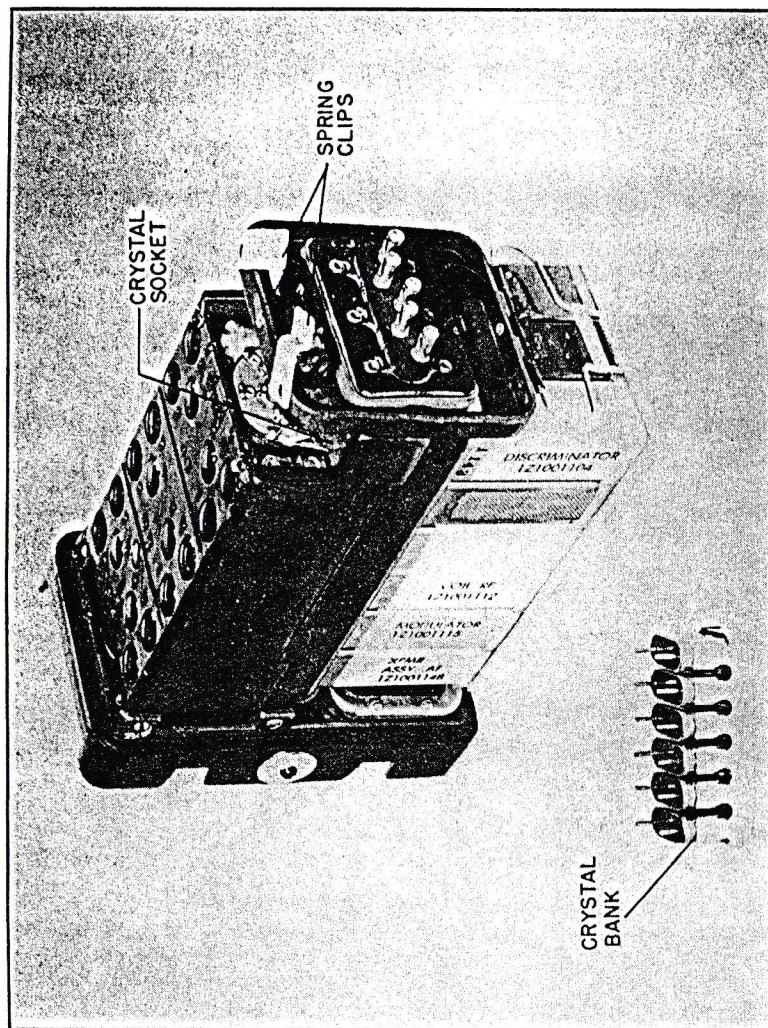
Receiver-Transmitter Assembly with Crystal Bank Removed
